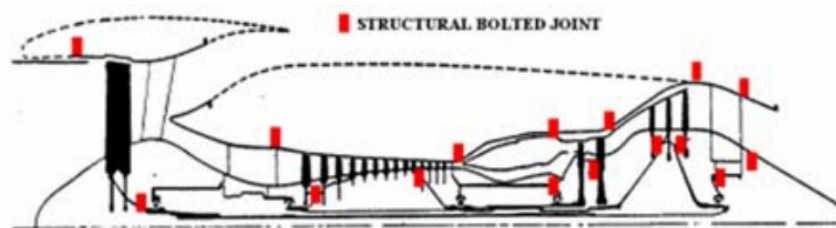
Location of bolted joints in a turbofan engine [7]
